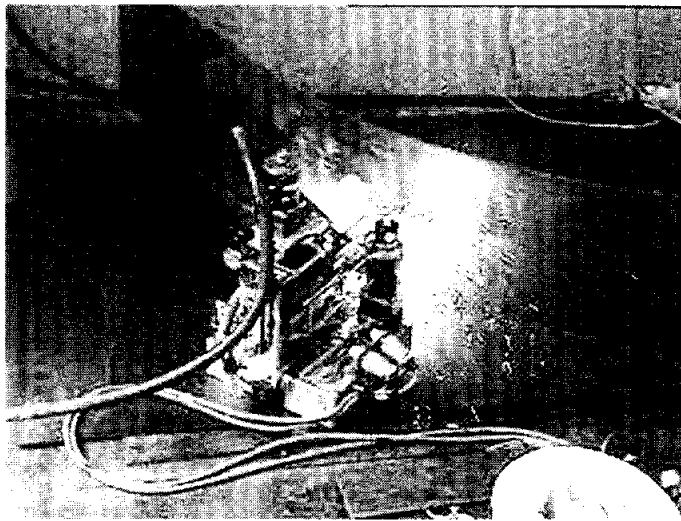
Welding scene of a welding mobile robot for smooth curved welding
